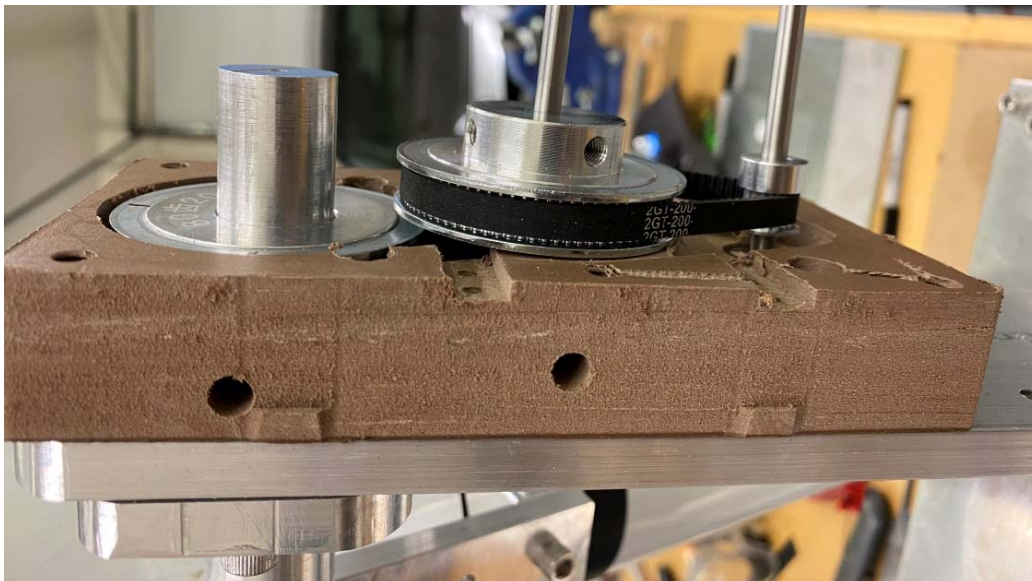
Side view of bottom clam shell showing access holes for tightening axle set-screws for the first 80-tooth pulley and first 16-tooth pulley
